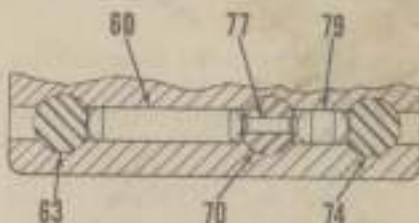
Cut-away view of D-17 transmission cover showing location of interlock plungers and pin.
